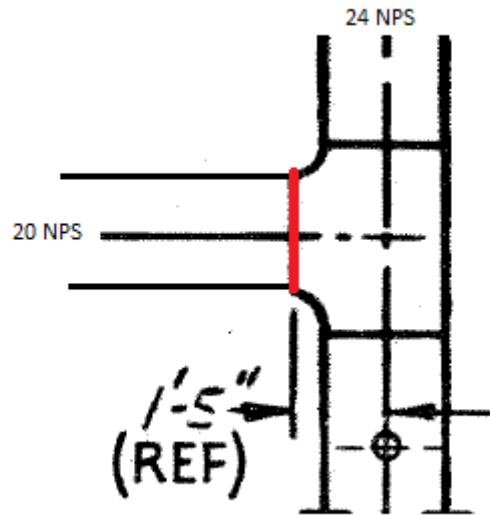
ISI-18.2 Taper on 20NPS RRC Reducing Tee for weld 20RRC(6)-1 highlighted in red.
